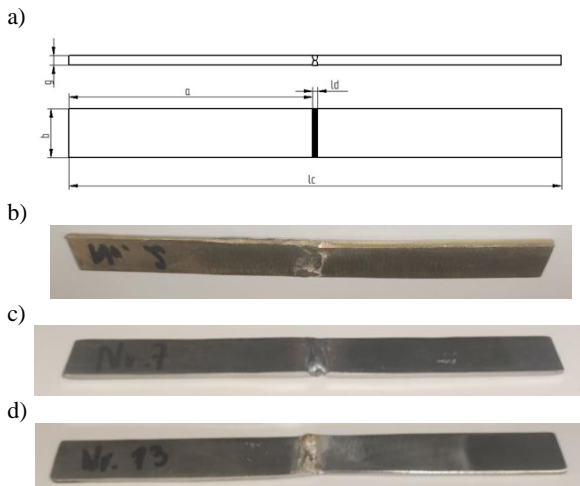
Welded joints: a) diagram of butt welded joint used in the tests, b) made of copper alloy, c) made of unalloyed structural steel, d) made of acid-resistant steel
